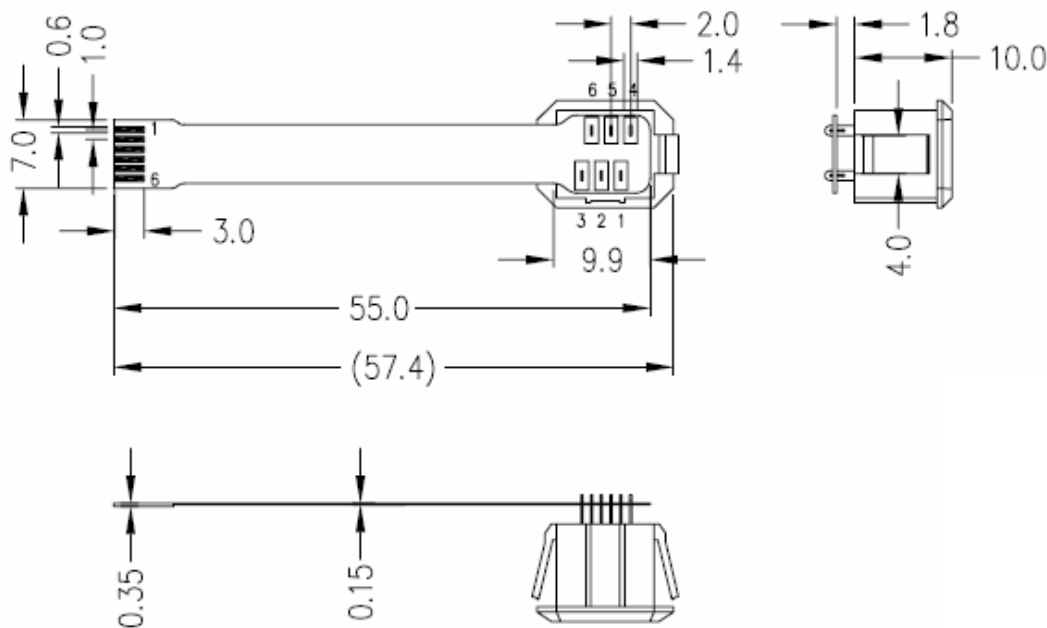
SMARTsat® sensor basic flex cable dimensions
